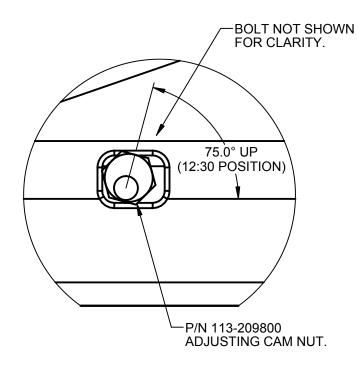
DETAIL OF ADJUSTING CAM NUT (POSITION OF ADJUSTING CAM NUT SHOWN IS RECOMMENDED INITIAL SETTING)
